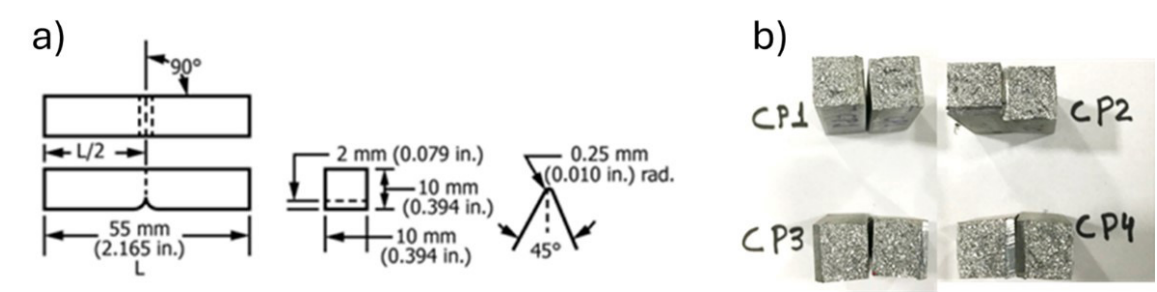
Charpy Impact Test: a) V-notch specimens full size dimensions, and b) appearance of shear fractures of Charpy impact test specimens.
